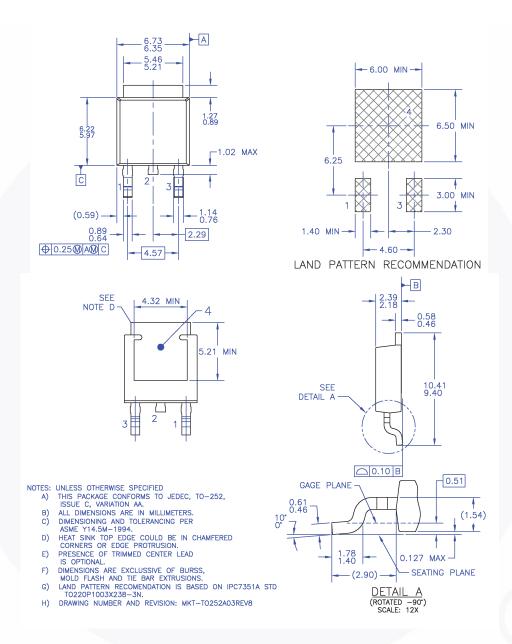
TO252 (D-PAK), Molded, 3 Lead, Option AA&AB
